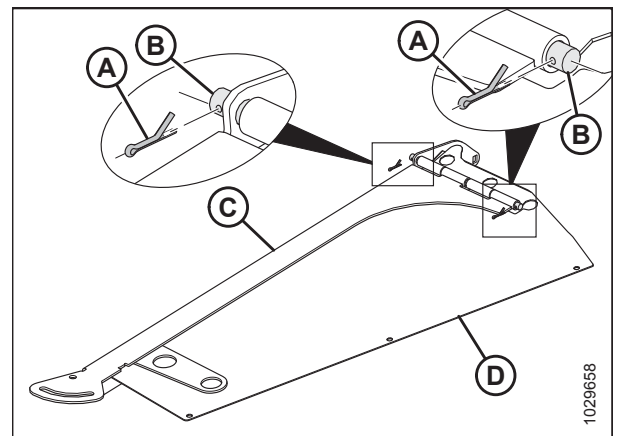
Deflector Hinge Rod and Cotter Pins
